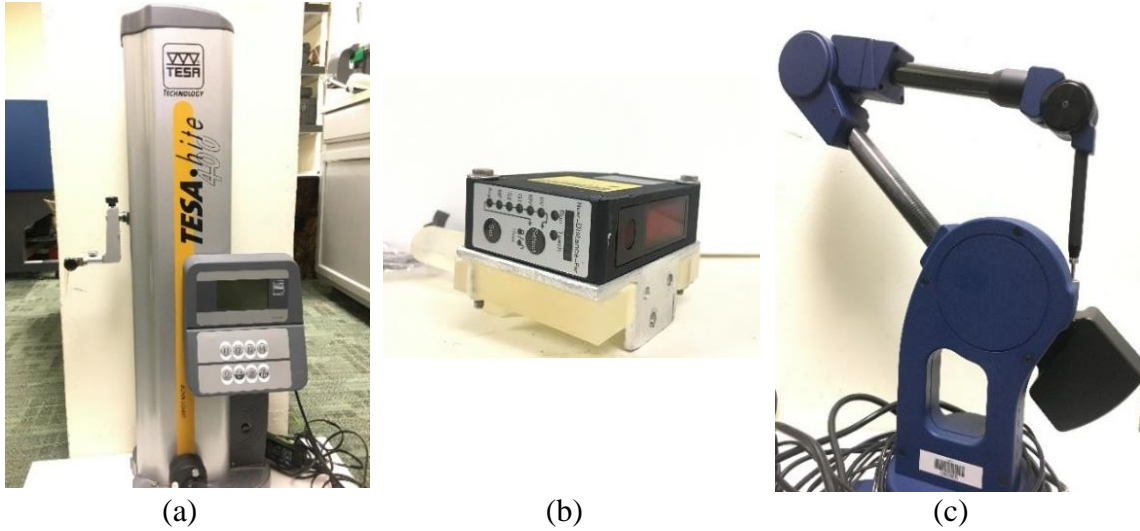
(a) TESA height gauge, (b) CMOS displacement laser measurement sensor, and (c) a coordinate-measuring machine (CMM).
